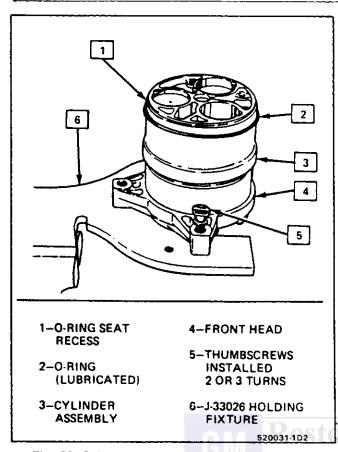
O-Ring Installation on Rear Cylinder O-Ring Seat Recess
